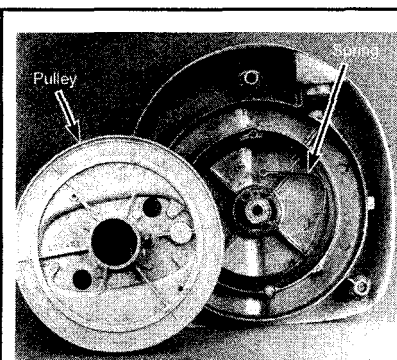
Typical pulley and spring assembly, as positioned to the housing assembly
